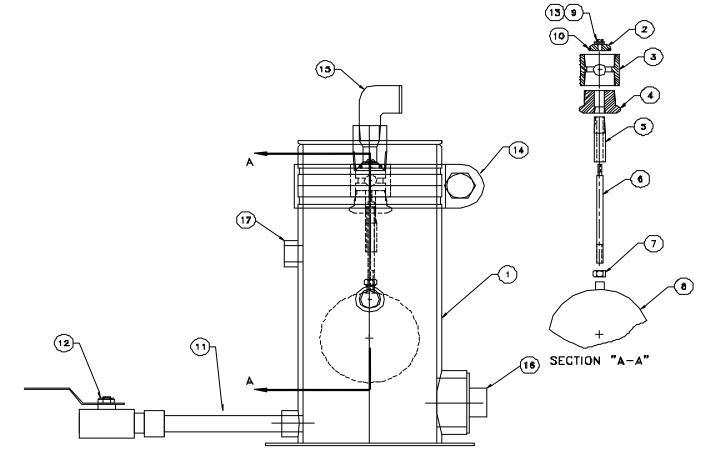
PUMP VAC., COND. TANK & MOTOR ASSEMBLY
